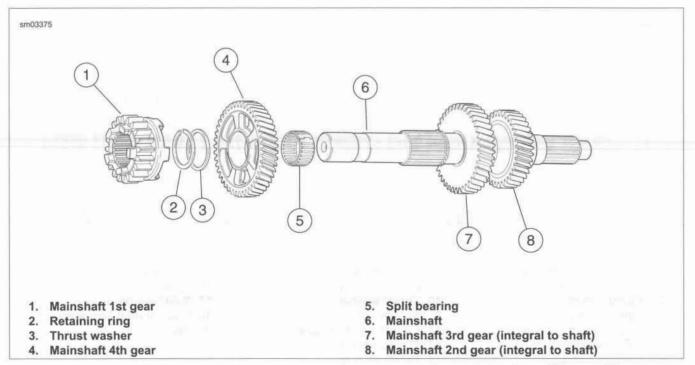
Transmission Mainshaft Assembly Once Removed from Left Crankcase/Disassembly
